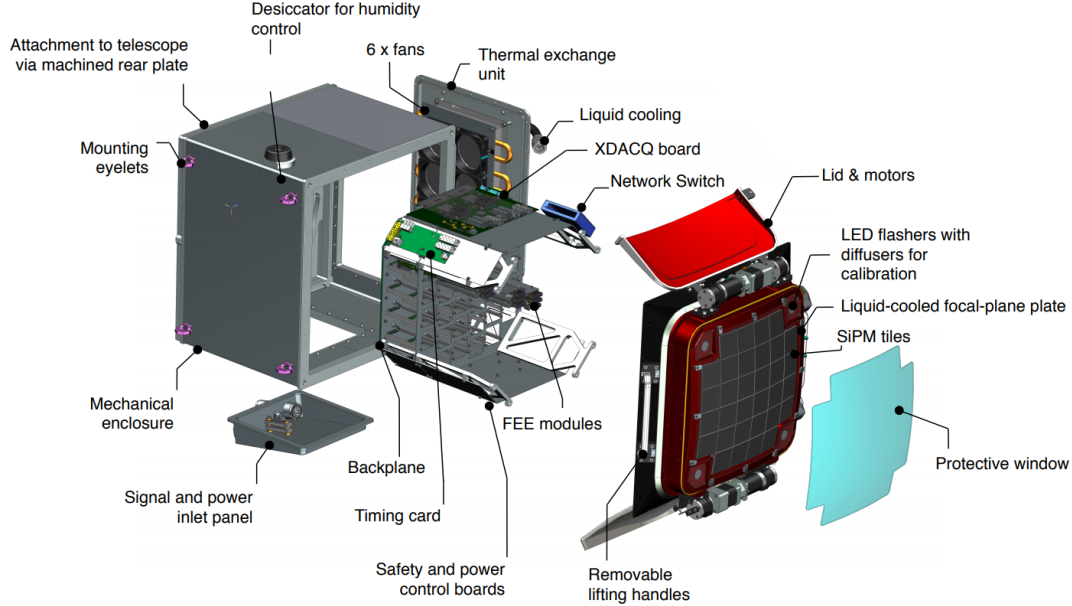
CHEC-S CAD explosion model with important parts highlighted [11].
